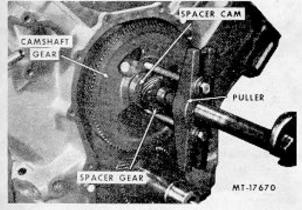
Removing Camshaft Gear, Distributor Gear and Fuel Pump Cam Using SE-1368 Puller
